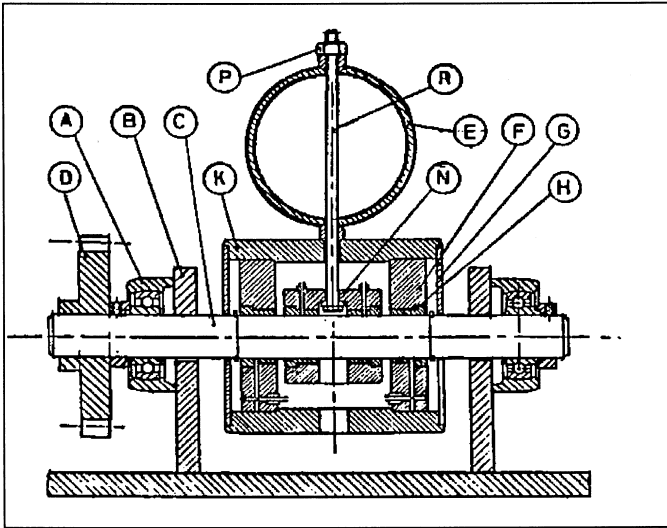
Cross-sectional view of friction measurement apparatus. (From Bearing and Lubrication Laboratory, Department of Mechanical Engineering, New Jersey Institute of Technology.)
